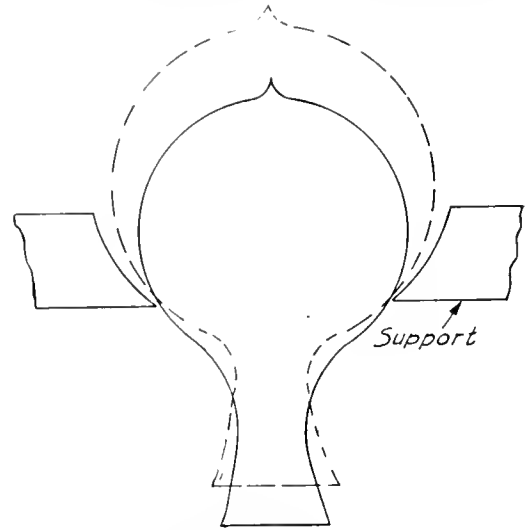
Showing How Height of Bulb in Mounting Machine Varies with Bulb Diameter
